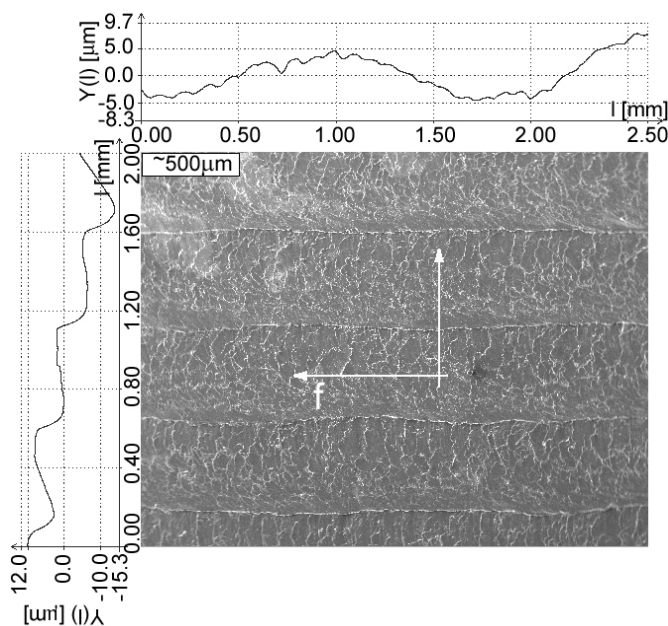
Morphology and longitudinal and lateral profilograms of a surface machined with a ball-end cutter. The cutting conditions used were: $f_z = 0.04$ mm/tooth, $a_p = 0.25$ mm, $f_w = 0.5$ mm, $D_c = 12$ mm, $n = 2500$ rpm, 45 steel workpiece material, 0° angle, out-cut milling. Magnification of 50
